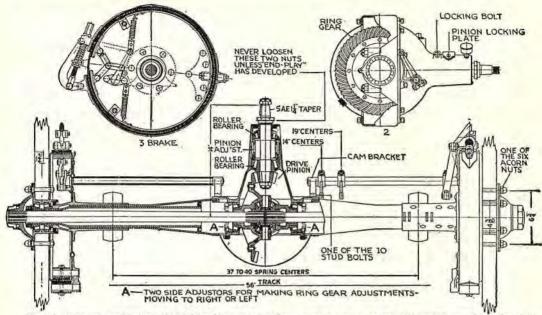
General specifications of the Columbia rear axle: For passenger cars: capacity 3,200-4,000 pounds, equipped for road without passengers; three-quarter floating type; one-piece rear-axle housing, with full-length reinforcing tubes; heavy-duty tapered roller bearings; alloy steel spiral bevel gears, case hardened and heat treated; adjustment provided for pinion and differential; alloy steel pinion shaft and drive shafts scientifically heat treated; sixteen-inch adjustable internal and external brakes. See page 891 for description of the brakes. Lubrication: Use Whitmore's No. 9 in summer, and Whitmore's No. 33 in winter, or Mobiloil "C," or Polarine "A," or Enarco medium.
